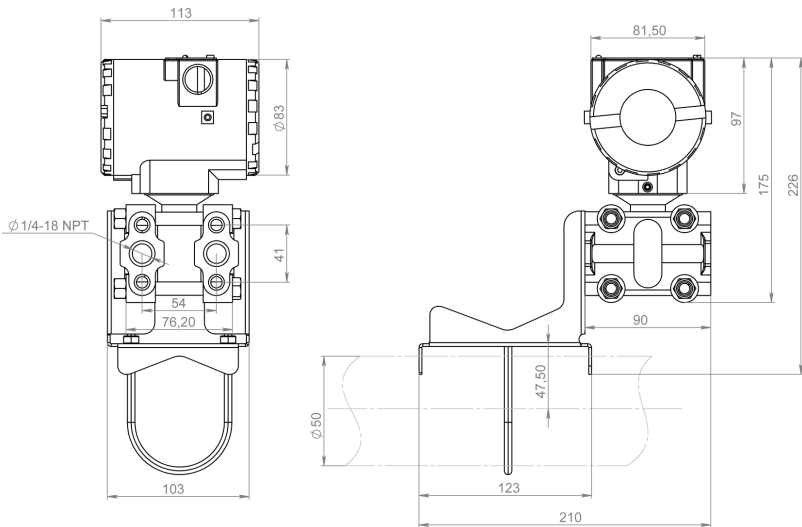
Mounting AMZ 5050 to a 2" pipe, angle bracket
